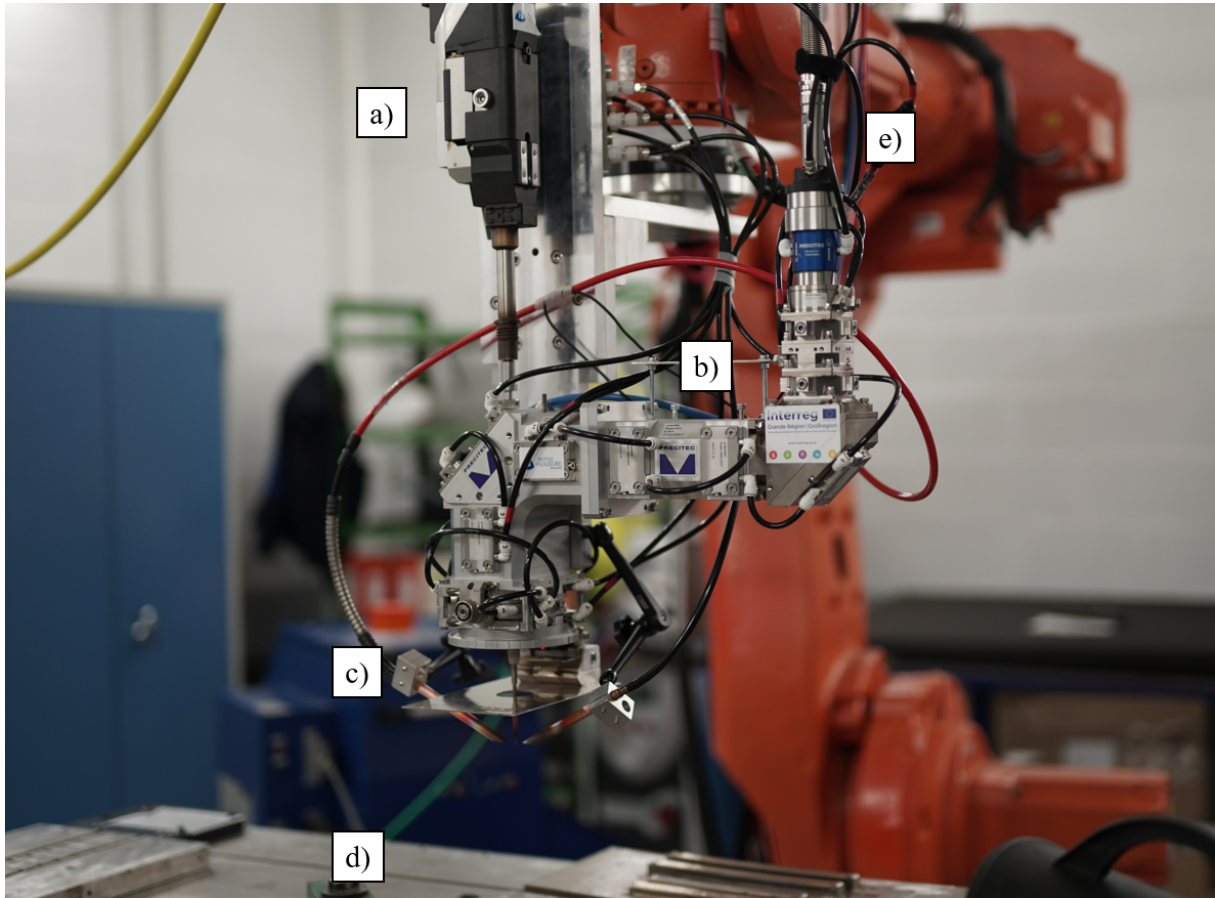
Laser and wire robotic setup at the Institut de Soudure with the (a) wire feeding delivery system, (b) laser head CoaxPrinter, (c) gas and wire nozzle, (d) working table, and (e) optical fibre connected to the CoaxPrinter.
